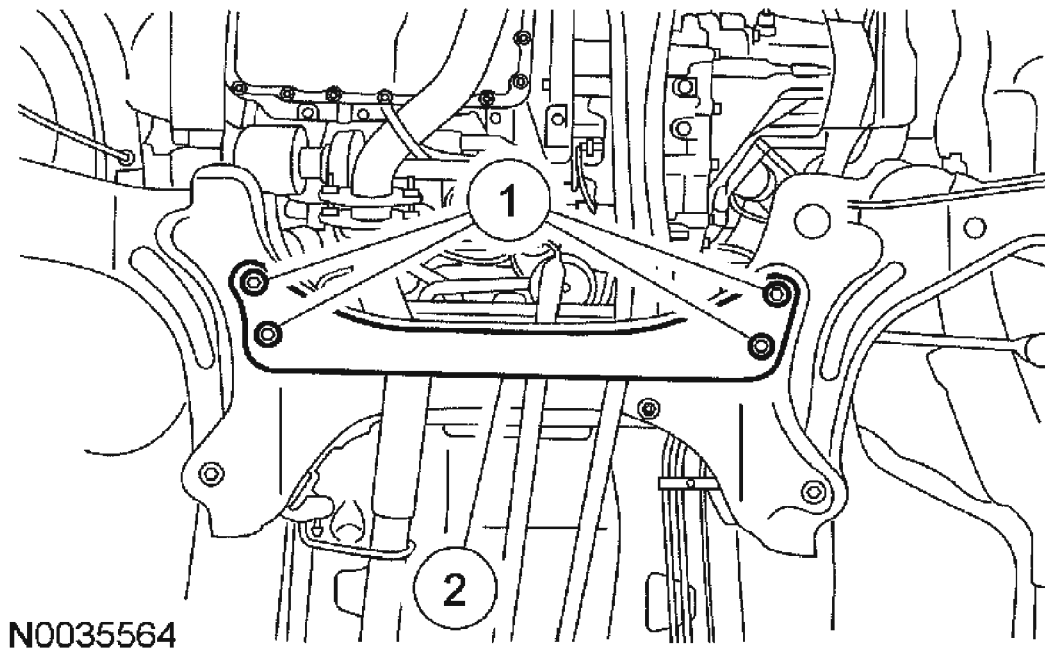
Remove Transaxle Rear Support Insulator
